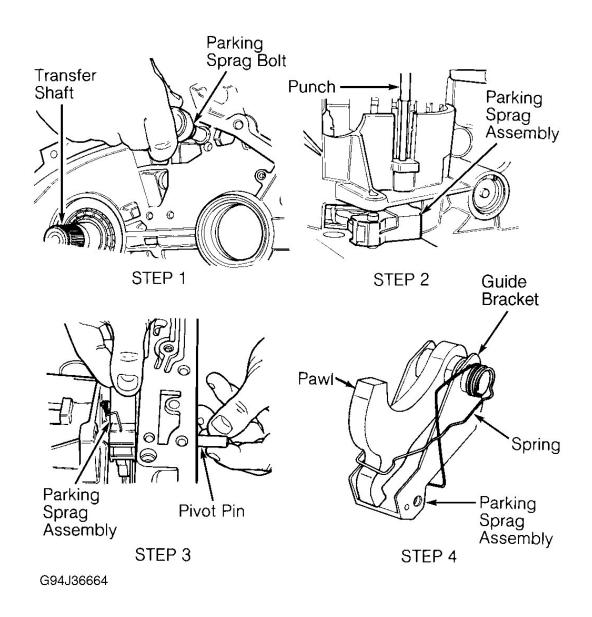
Removing & Installing Parking Sprag Assembly Courtesy of CHRYSLER LLC
